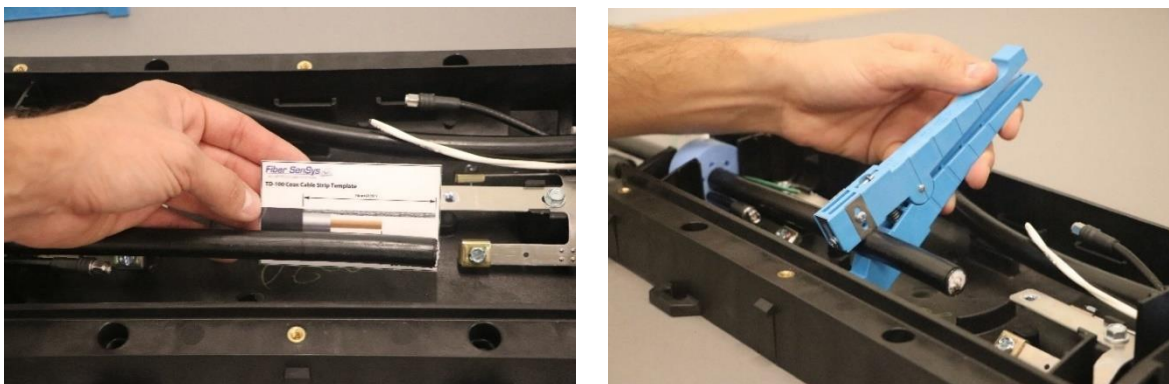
Stripping the sensor cable using the DW-ENG-51 template
